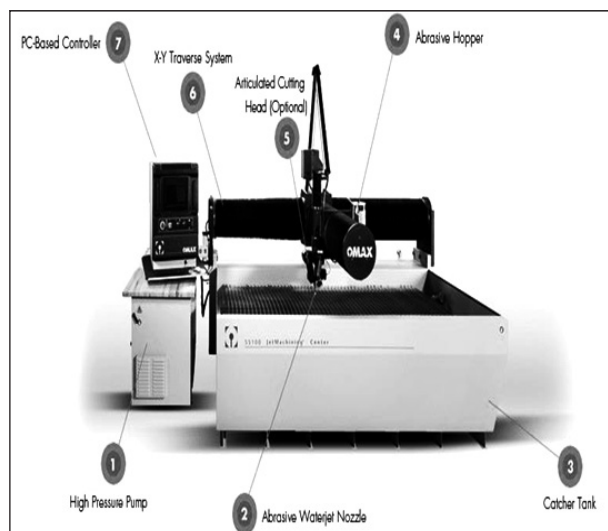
Photograph of OMAX 2626 abrasive water jet machining centre
